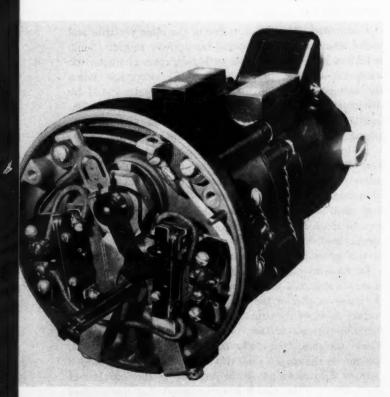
Limit switch mechanism employed in aircraft cowl-flap motor
